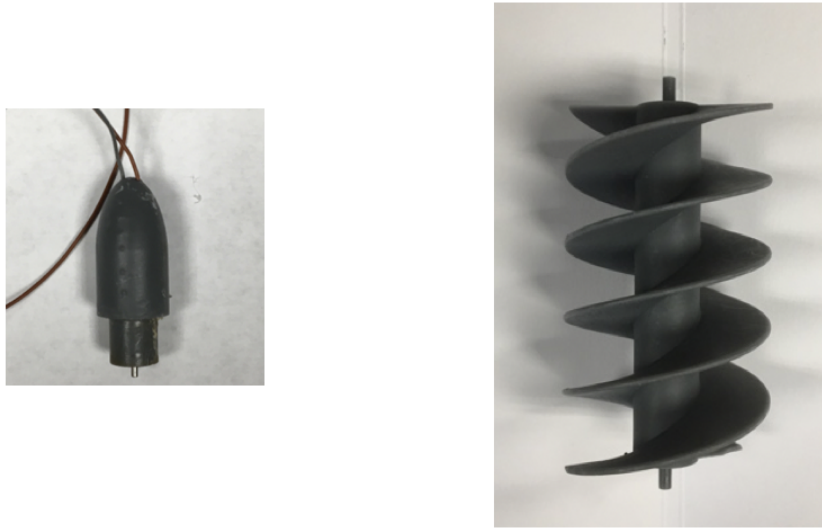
PRINTED GENERATOR CASING WITH GENERATOR INSIDE (LEFT) AND PRINTED AST (RIGHT).
